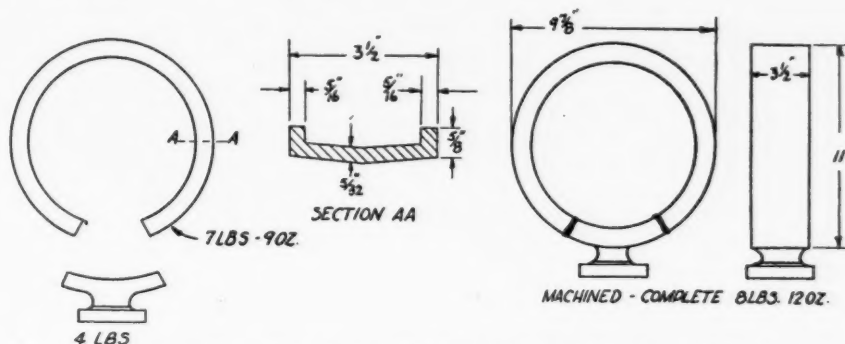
Showing how differential housing is built up from the bent piece of channel and a forging
